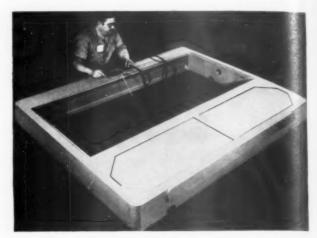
The new welded steel base for 150 KW machine shown in Fig. 1.
